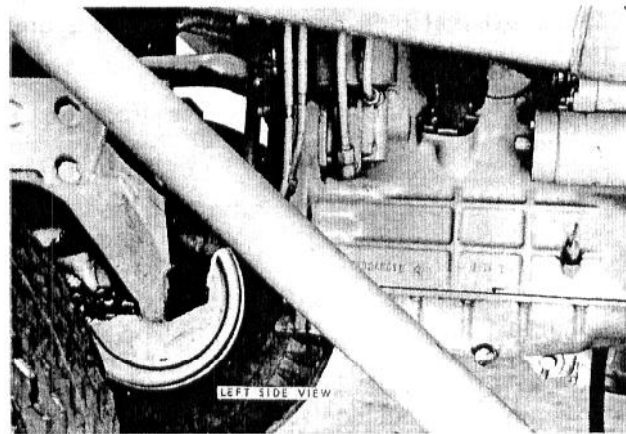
VIEW OF ENGINE ROLLED REARWARD FROM FRONT AXLE
